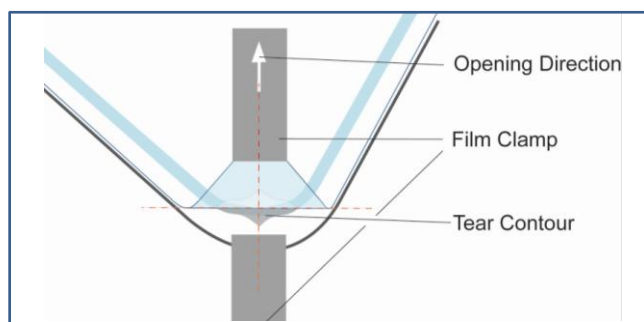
Illustration of the clamping of packaging with alignment of the clamp to the tear contour
